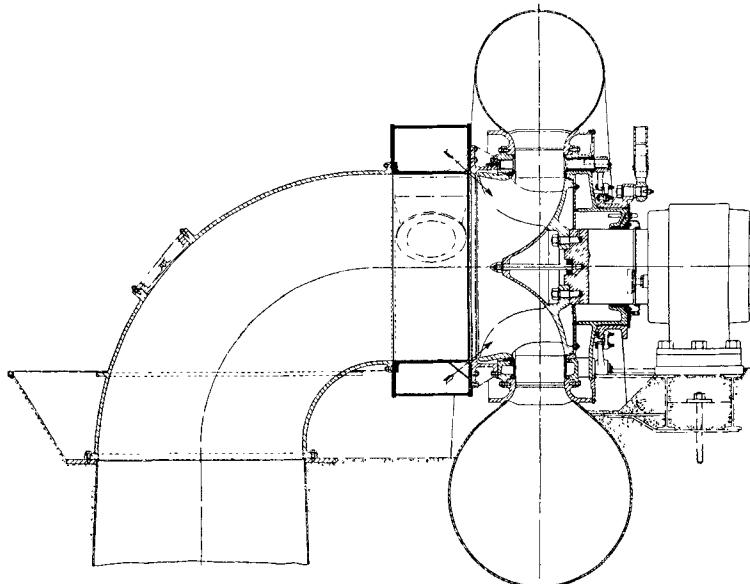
Horizontal Shaft Arrangement of Hydraulic Brake
